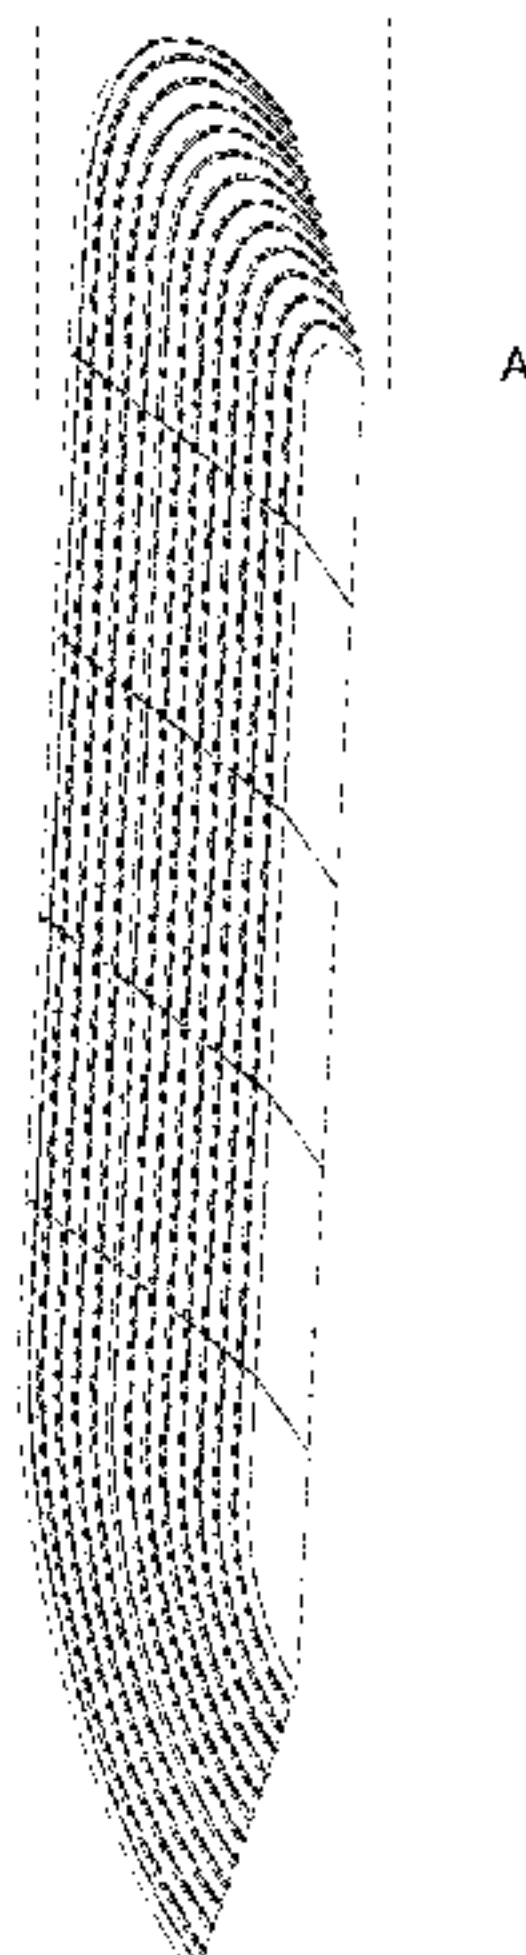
is a partially enlarged view of a part "A" circled in FIG. 1.9.
